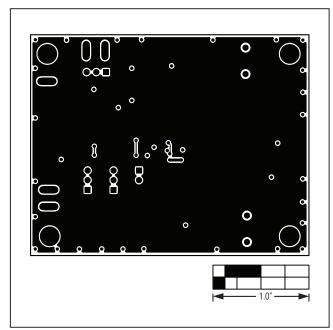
MAX14532E EV Kit PCB Layout—Inner Layer 3
